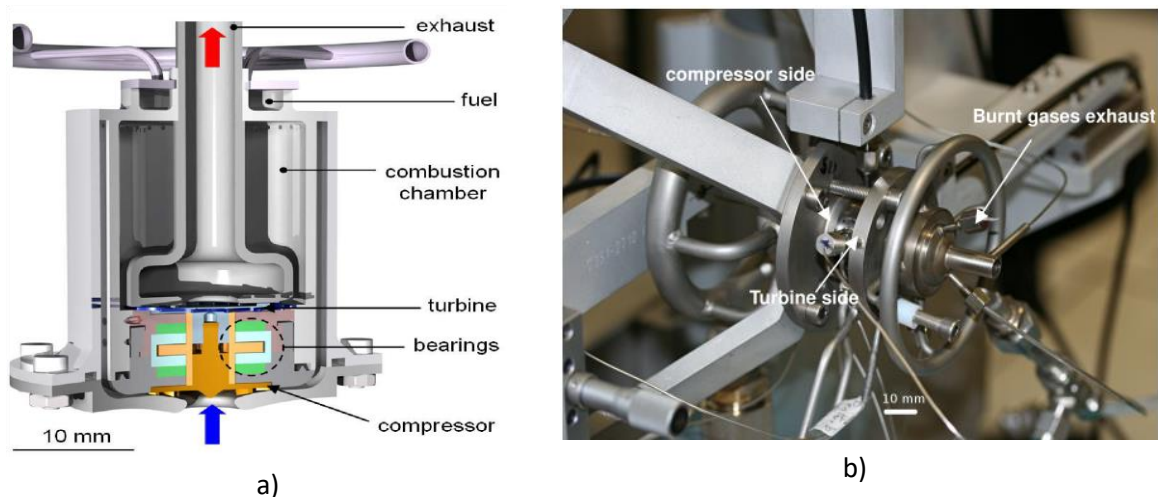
a) Architecture of the micro gas turbine motor [82]. b) Prototype on the test bench.
